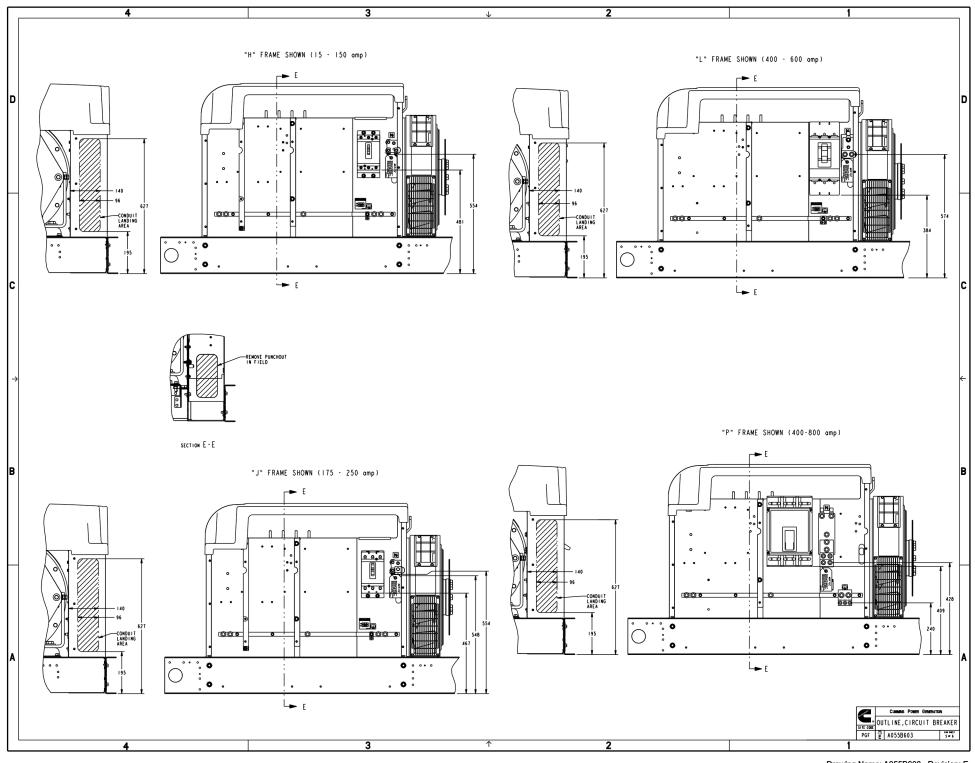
CIRCUIT BREAKER OUTLINE DRAWING (SHEET 5 OF 6)
